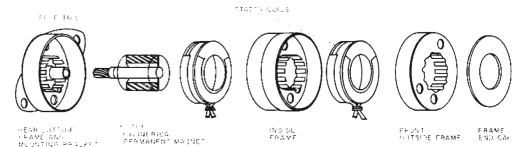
An exploded view of a typical stepper motor showing internal construction.
